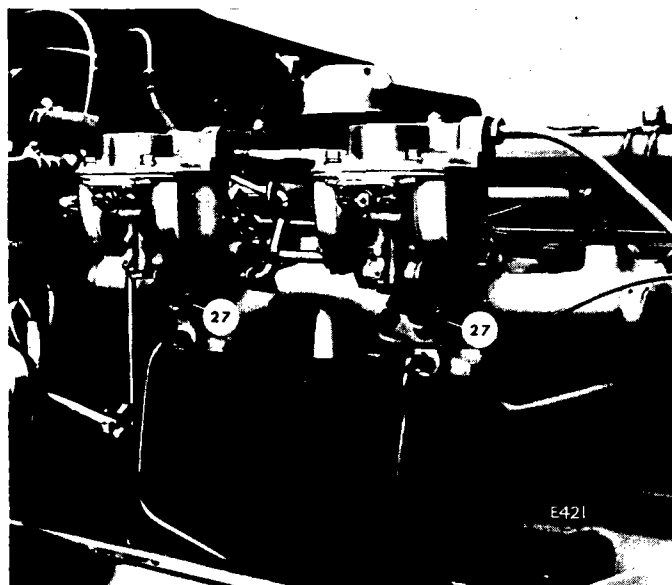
R.H. view of carburettors showing throttle stop screws (43) and mixture control screws (27)
